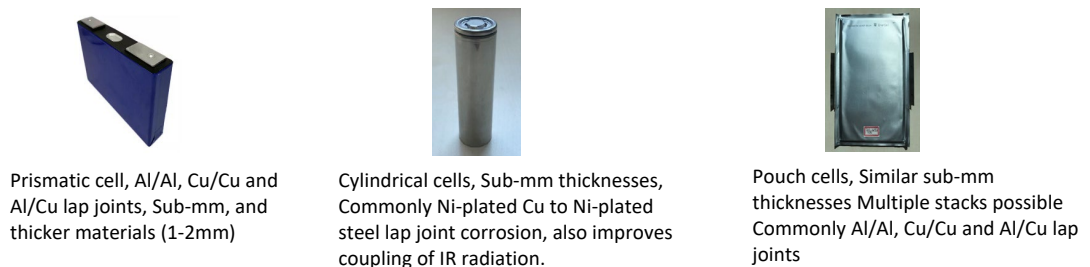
Types of lithium-ion batteries and types of materials/weld joints used to build the batteries.
